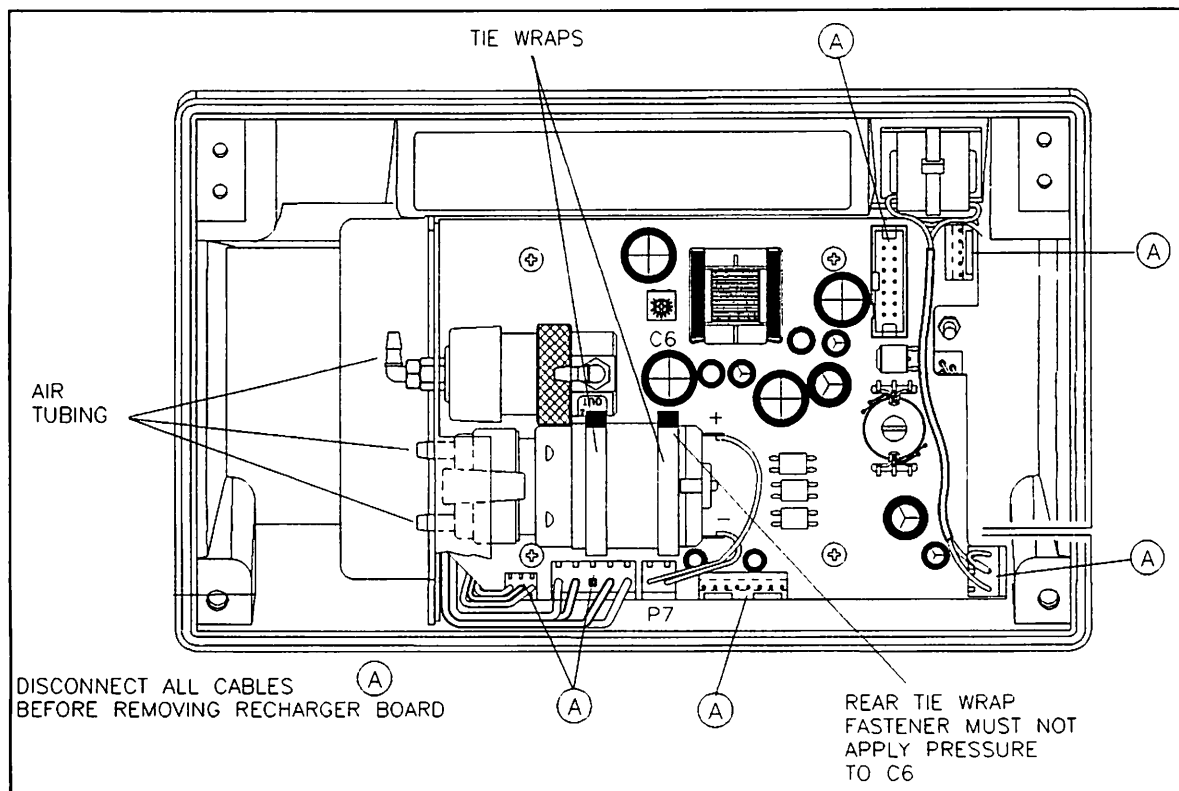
Recharger Board Screws, Connectors & Cables
